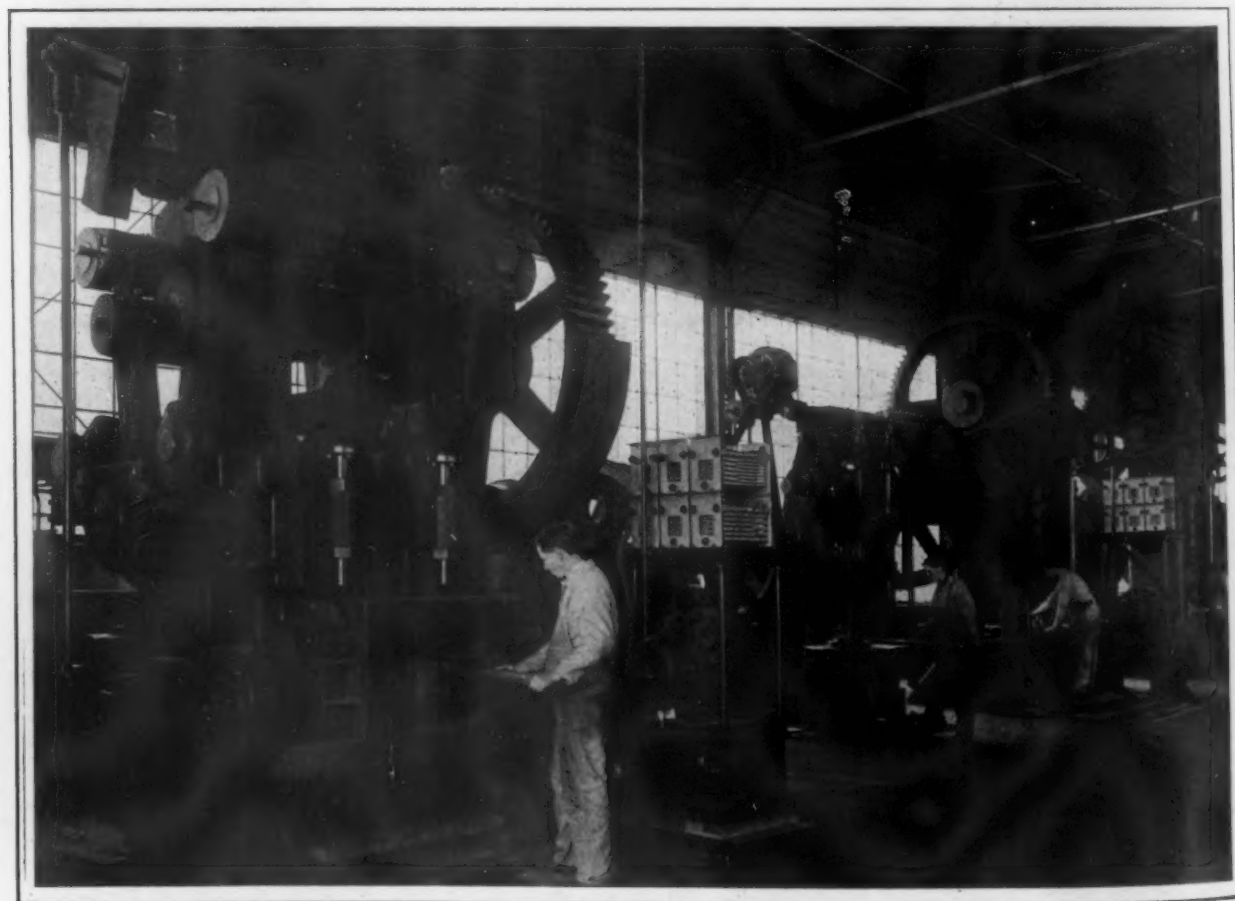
View in the Shop of the Mark Mfg. Company Showing One of the Heavy Double-Acting Toggle Drawing Presses on Which the Parts of the Union Are Stamped from Strip Steel and Cupped
